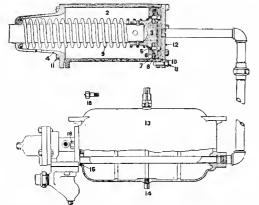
8-in. x 12-in. Car Brake Cylinder, with Type T-1 Triple Valve.
